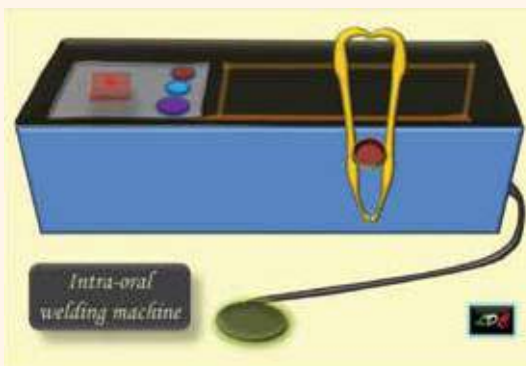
Schematic drawing of Mondani intraoral solder unit
